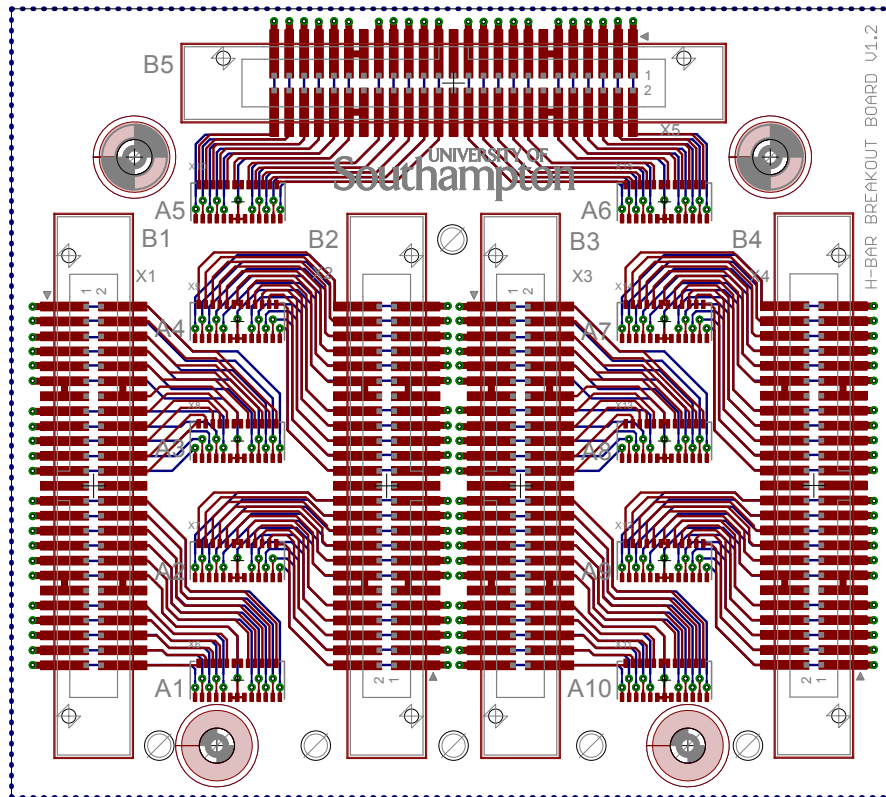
Breakout PCB v1.2 Layout (Top copper layer red, bottom copper layer blue)
